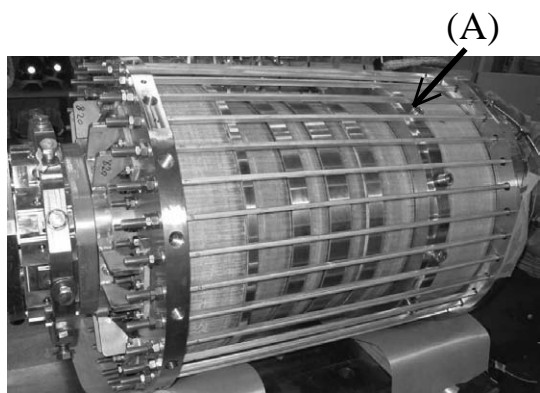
Photograph of the coil assembly. (A) is a 30 mm thick stainless steel disk inserted between the SL1 and the SL2.
